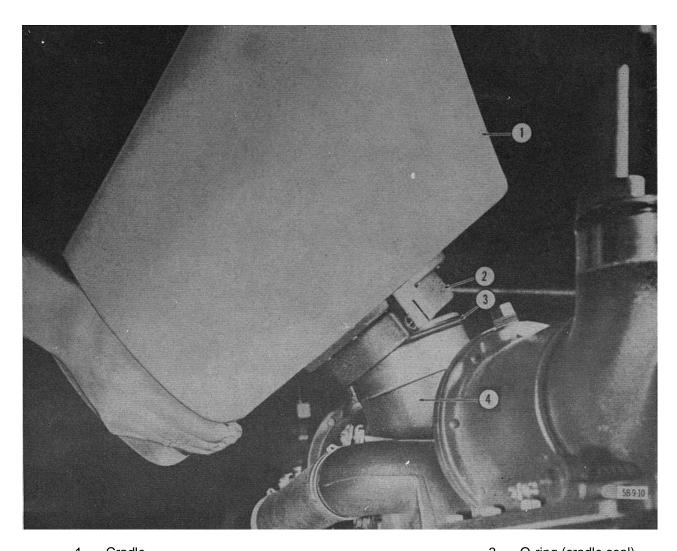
Cradle-valve assembly, assembly, cutaway view (Model 4310CA).
